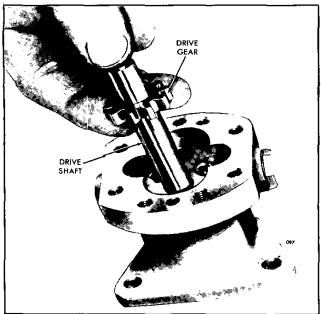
Installing Fuel Pump Drive Shaft and Gear Assembly
